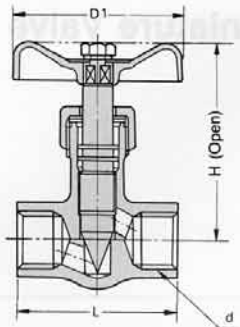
A 20K Threaded End Miniature Valve (Straight) mm
